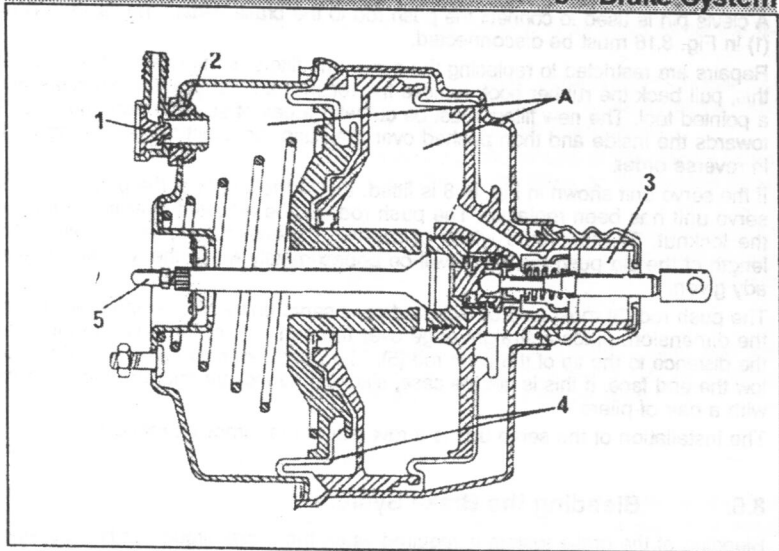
Sectional view of the brake servo unit with two working chambers. The push rod of this type of servo unit must not be adjusted.
